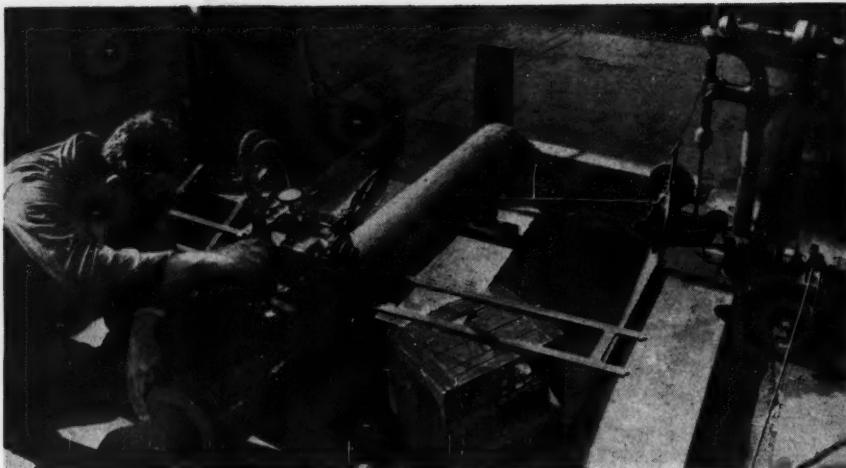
Tubing Revolves Beneath a Stationary Cutting Torch as the Drill Press Reels in Wire Wrapped Around the Tube
